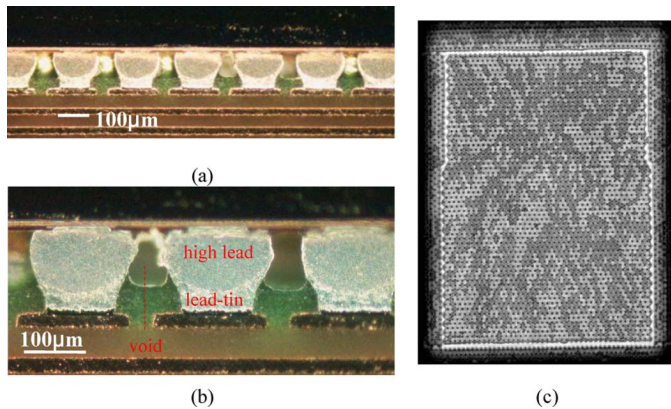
Micrographs of FCIP built using no-flow underfill material under the reflow conditions of ramp rate: 2.1 °C/s, reflow time: 70 s, peak temp: 225 °C. (a) cross-sectional view of flip chip solders joints (magnification: 100 ×). (b) cross-sectional view of flip chip solders joints (magnification: 200 ×). (c) C-SAM analysis [13].
